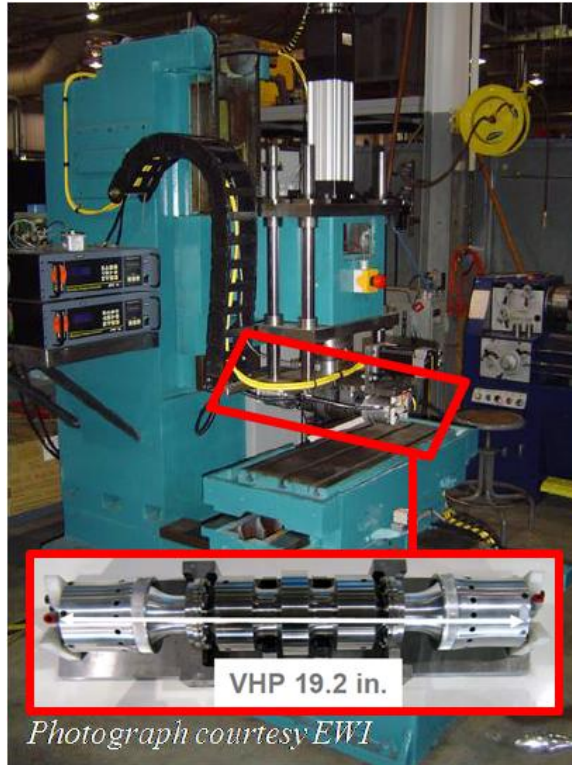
Very-high-power UAM system, with detail of ultrasonic stack (courtesy of Edison Welding Institute)
